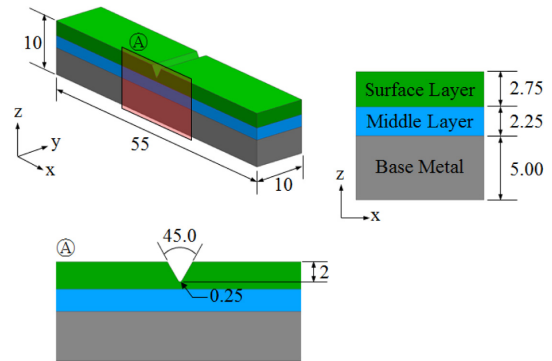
Illustration of impact test specimen; inset (A) shows the detail shape and deposition of a notch (unit: mm)
